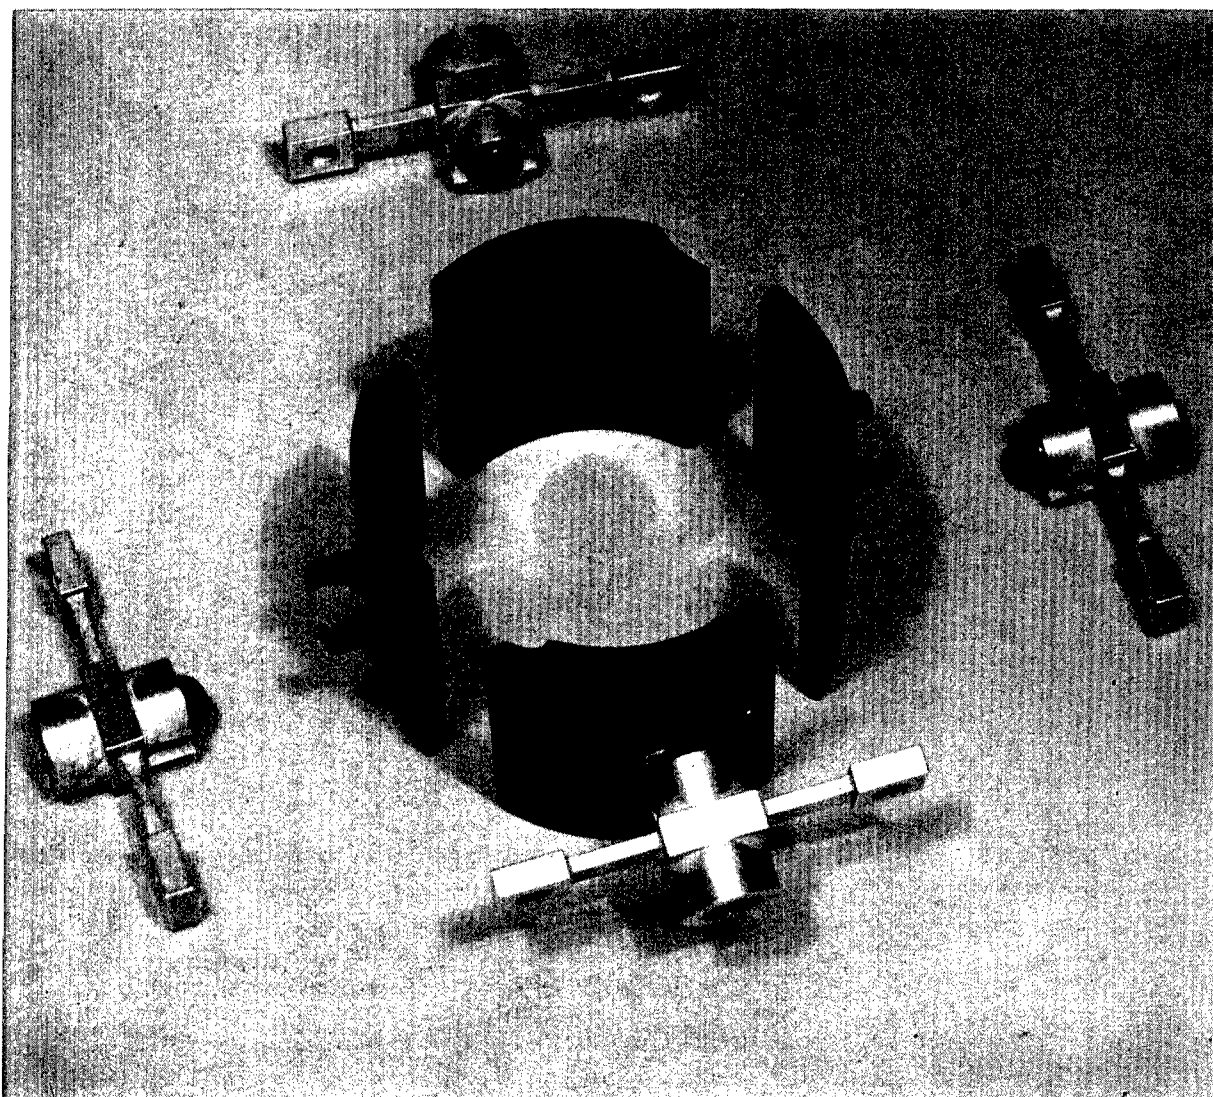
View of No. 1 Bearing Pivot-Support Flexures And Pivoted-Pads For Initial Bearing Design
